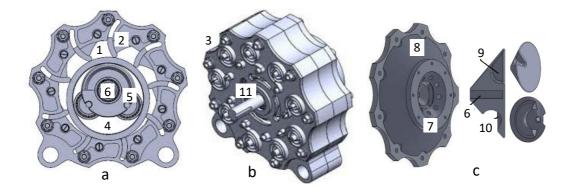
Design of pneumatic motor Angelo Di Pietro with nine chambers: a – view without covers; b – assembled, front view; c – assembling of air distributor in the rear cover.
